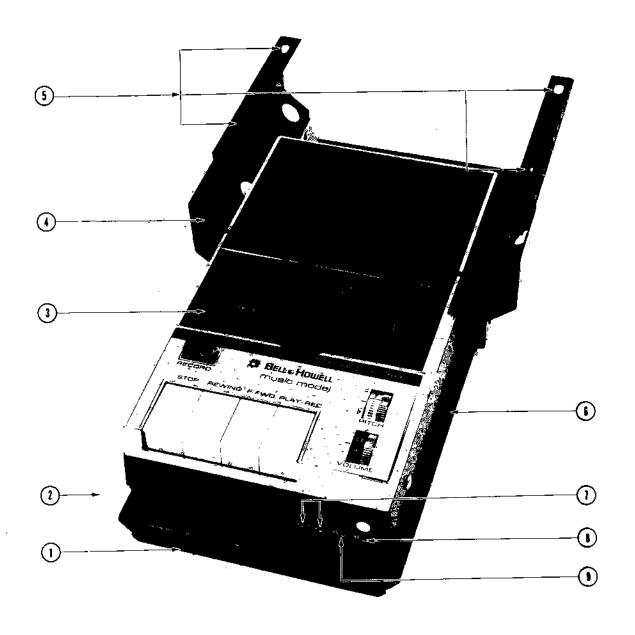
CASSETTE DRAWER FINAL ASSEMBLY
